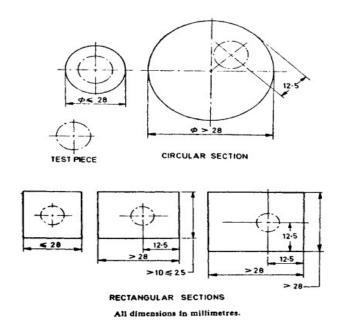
LOCATION OF THE TENSILE TEST PIECES IN THE PRODUCTS
